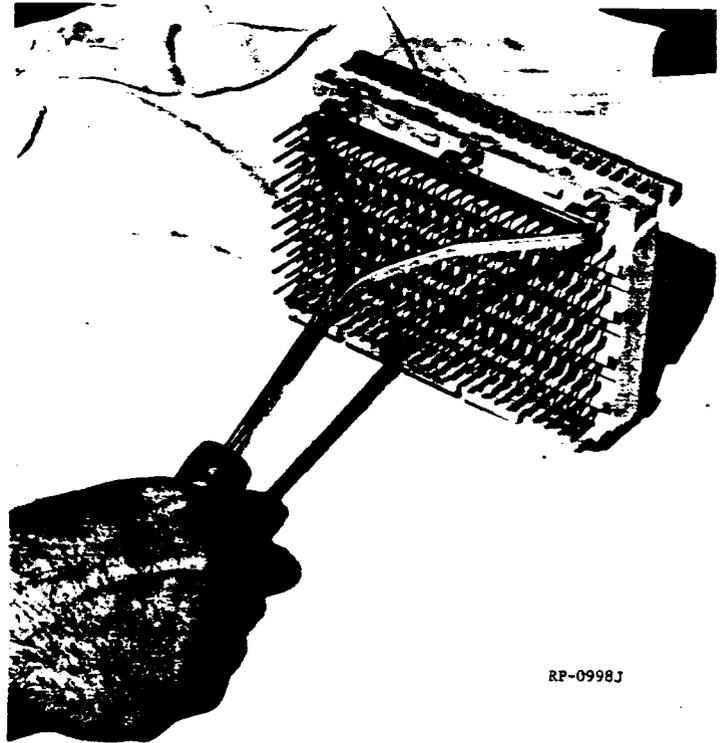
REMOVING 78 OR 112 TYPE BLOCK FROM POSITION WITH KS-21345 TOOL
